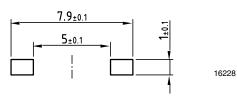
Issue: 4; 08.05.03
